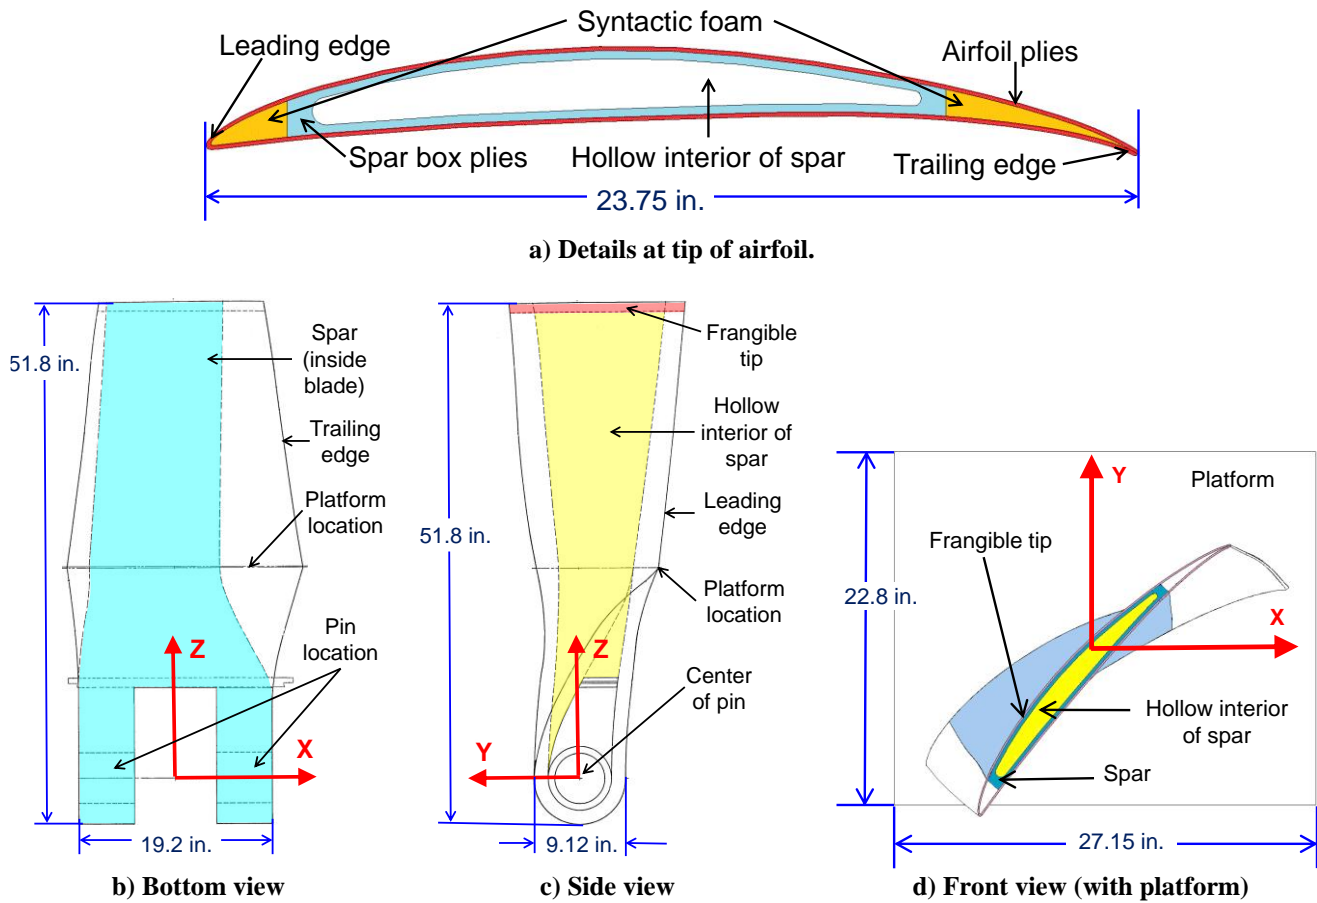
Drawings of NTF wind tunnel fan blade with dimensions.
